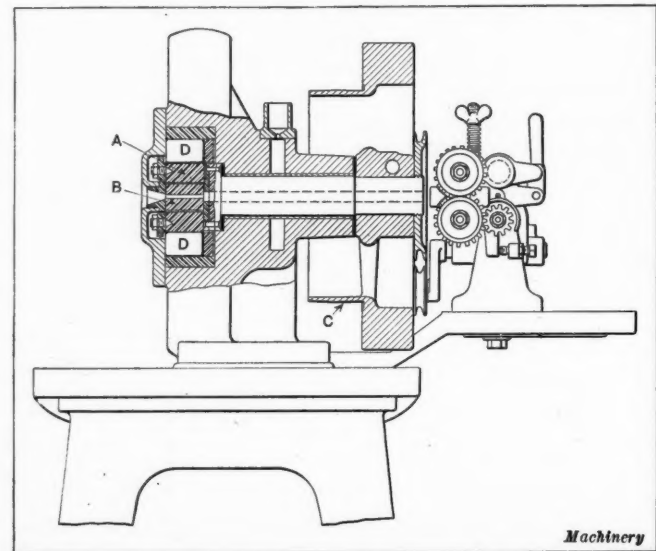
Longitudinal Section through Head of Langelier Swaging Machine
